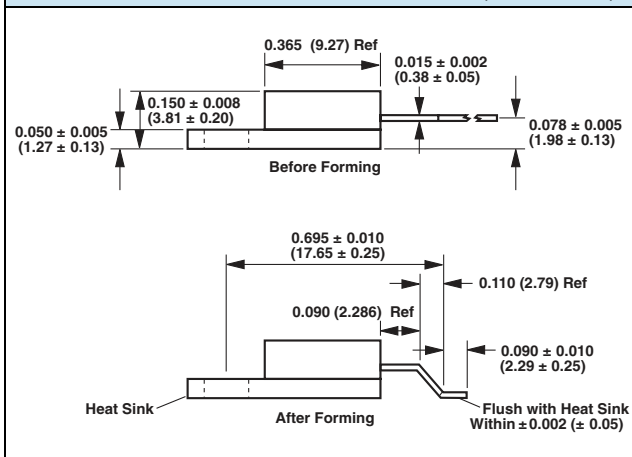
VPR220SZ DIMENSIONS in inches (millimeters)
